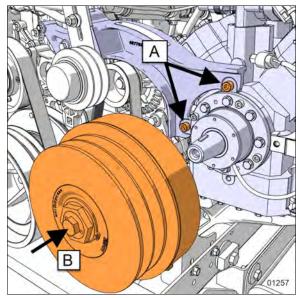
CLUTCH ASSEMBLY REINSTALLATION
